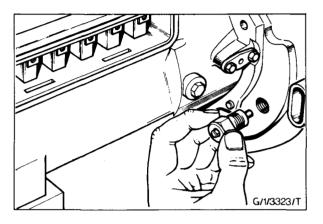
Fitting the Timing Tool to the Pump (Dorset)
